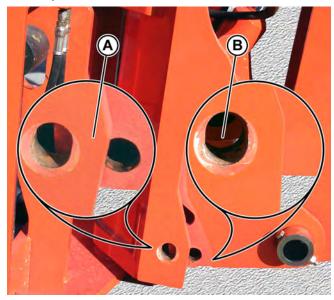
Tilt Attachment To Align Holes Between Quick Attach Adapter and Attachment.
